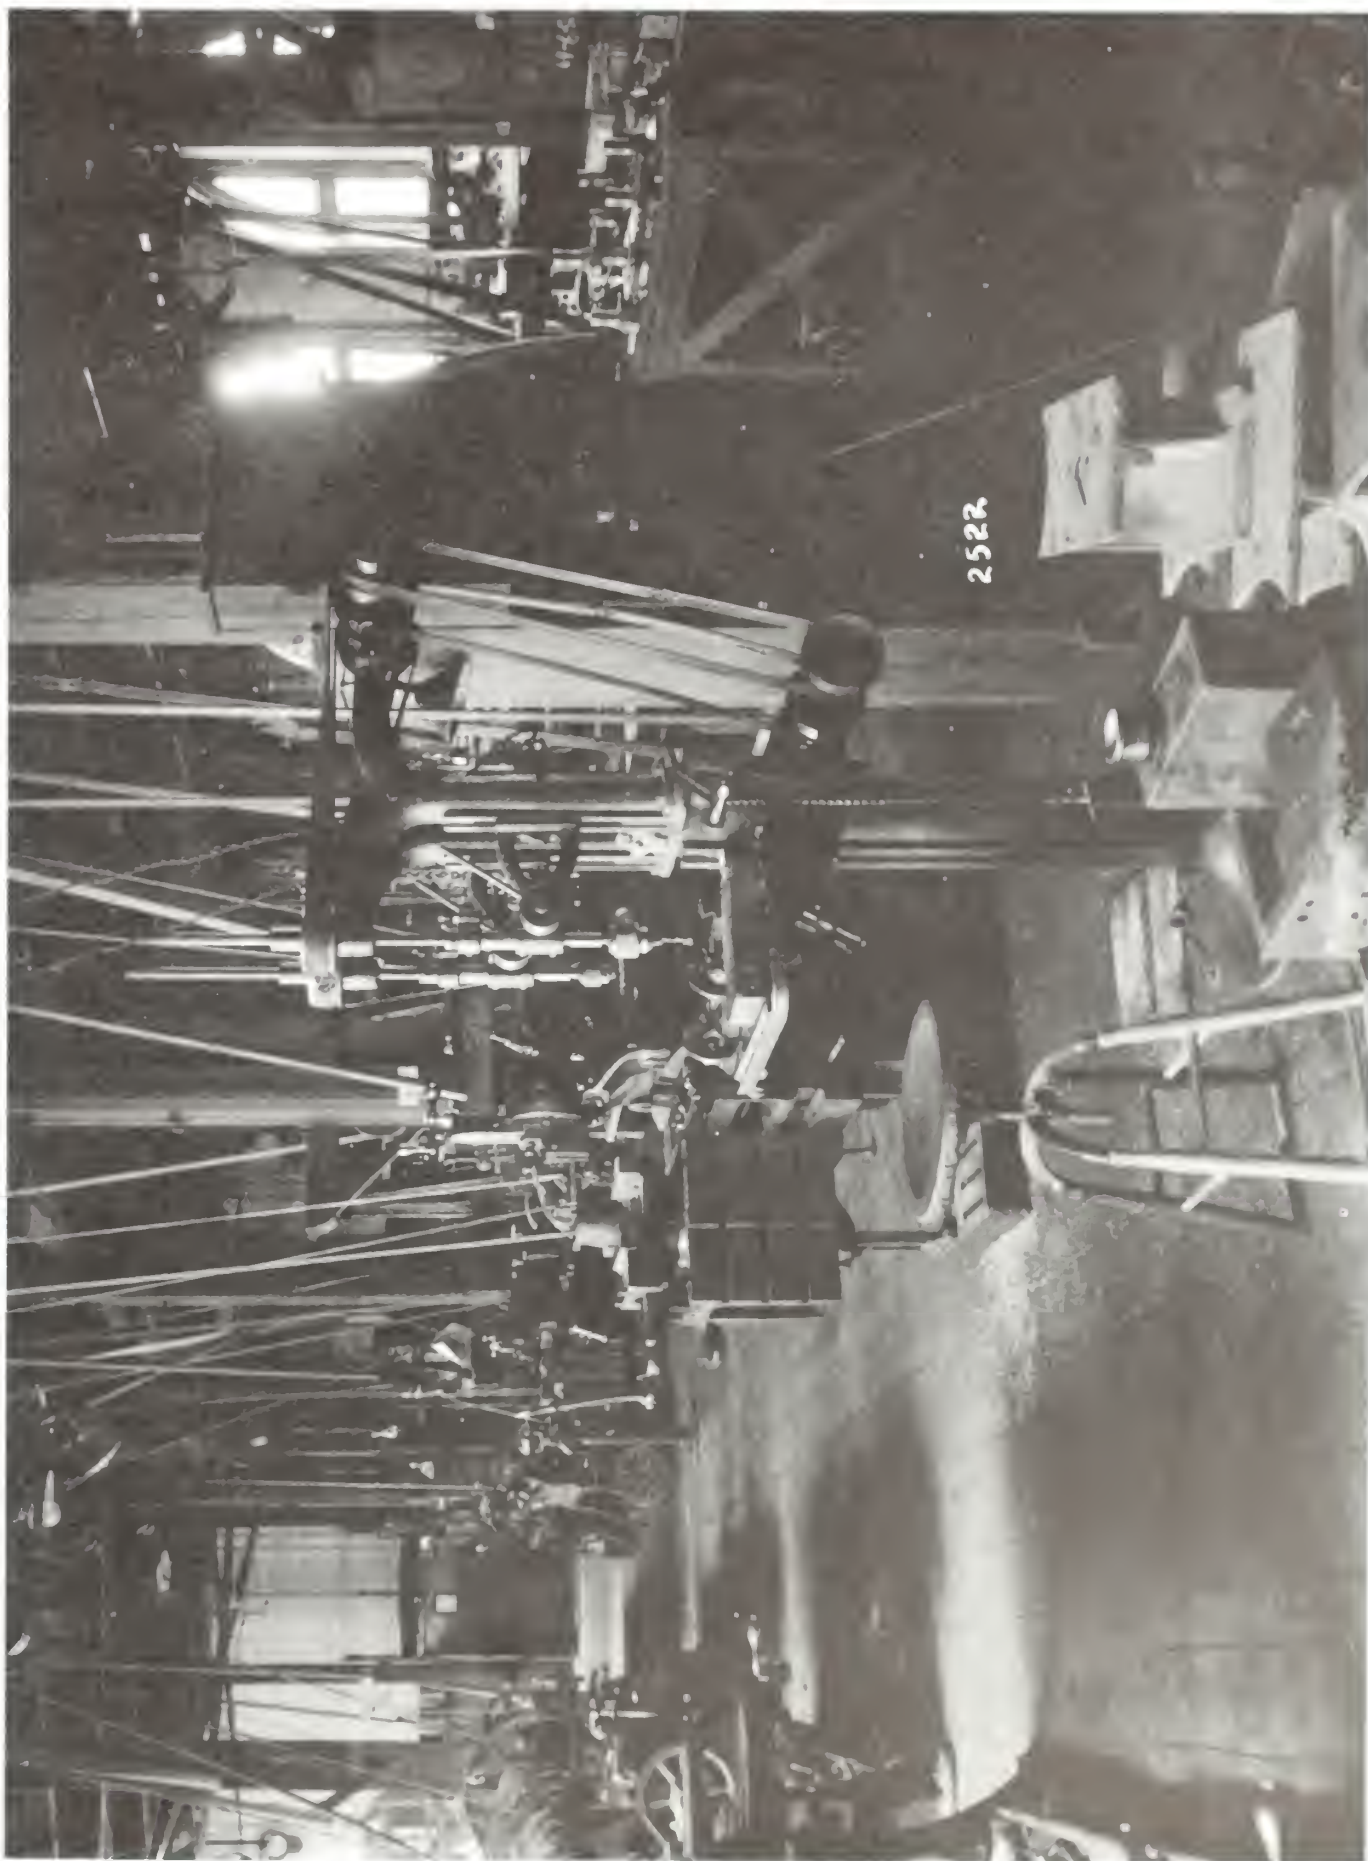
Heavy machine shop, Building 5, south aisle, looking east,
